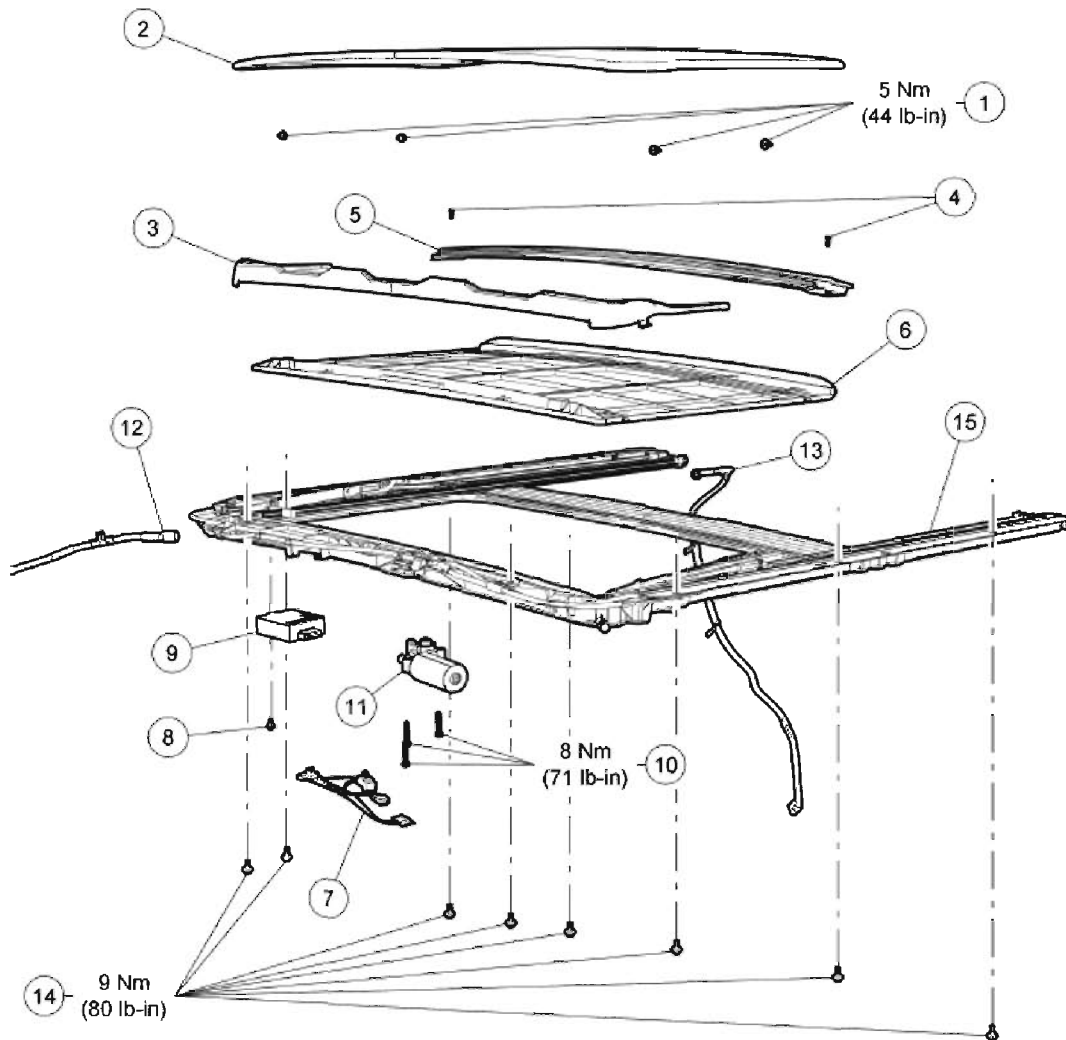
Tightening Roof Opening Panel Glass Screws With Torque Specifications
